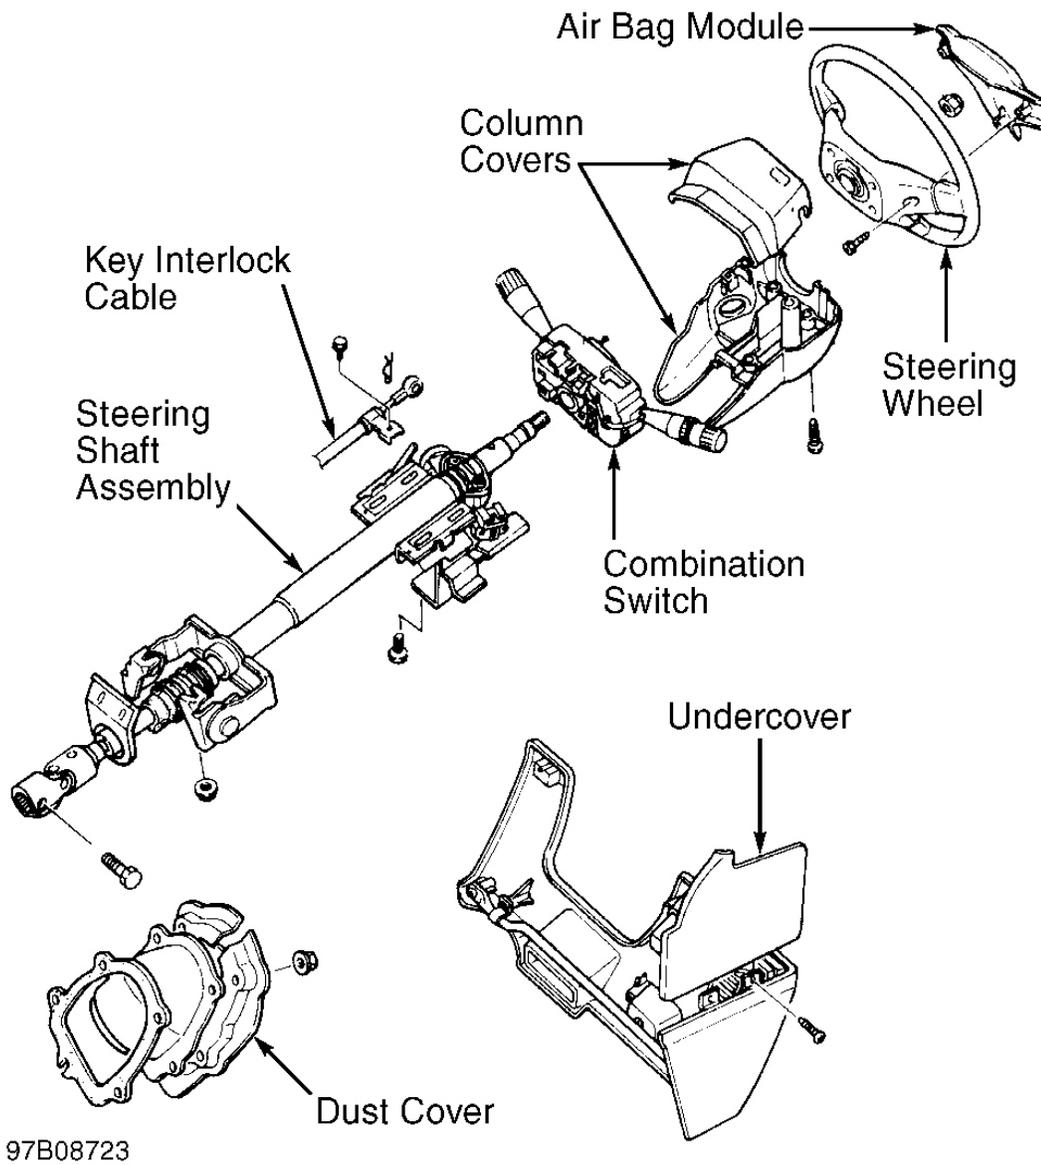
Exploded View Of Steering Column (MX-3 & Protege)
